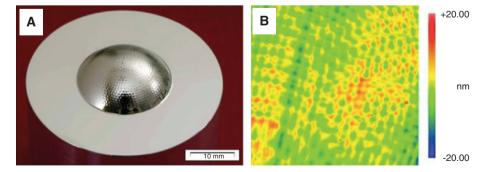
Optical device of the compound eye: (A) fabricated mold using SSS, (B) compound eye lens fabricated by microinjection molding [22].
